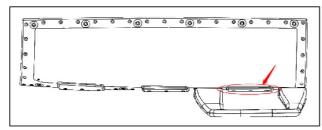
LH Pod Assembly Cover Cutout Location (RH Opposite)
